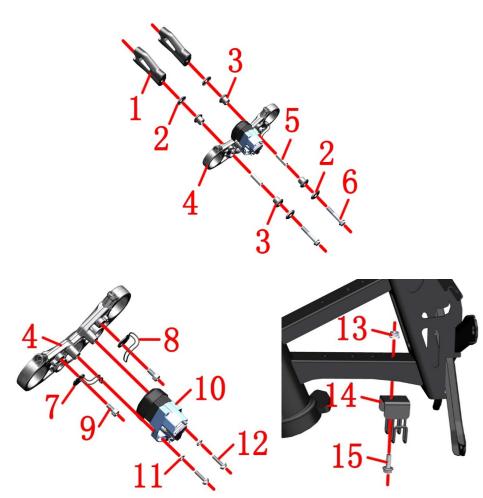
F	FRONT FORK	Shanglian board, direction of the pad component	CHK	40)
